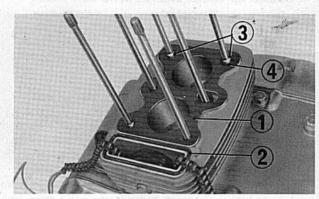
(1) Cylinder head gasket (2) Cam chain chamber gasket
